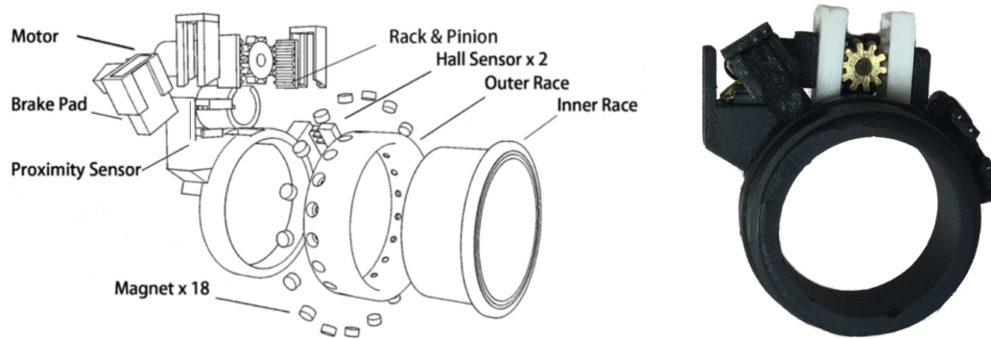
Left: A prototype assembly explosion diagram of the prototype. Right: The front view of the prototype ring.
